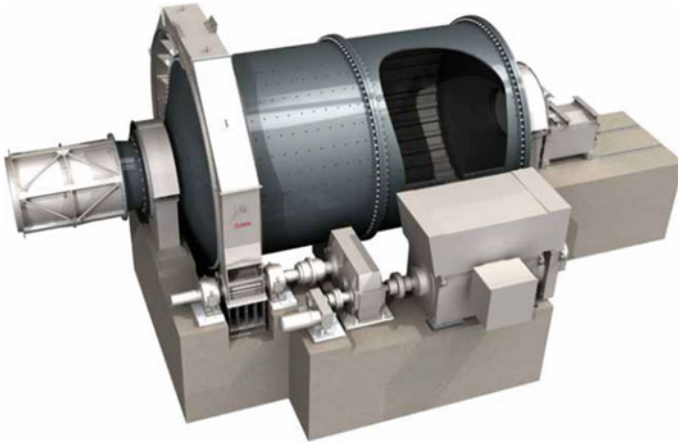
Typical trunnion supported mill design with motor, gearbox pinion and ring-gear (Outotec 2015)
